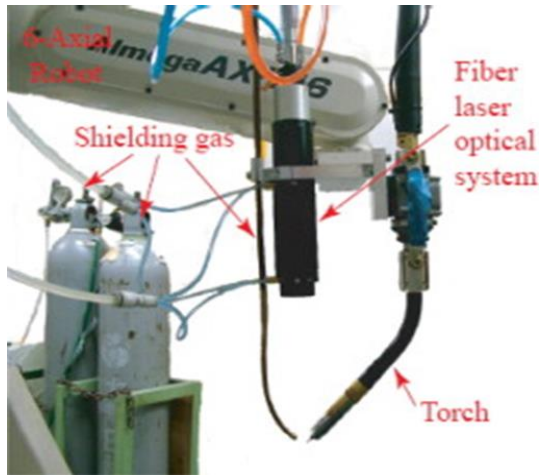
Fiber laser-GMAW hybrid welding system.
